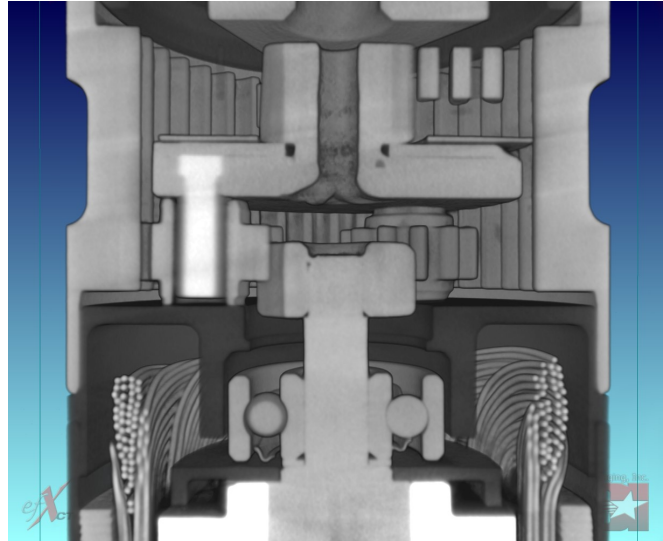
Side View of the First Planetary Gear Stage with the Motor Pinion at the Center. The Bearing is Displaced Downward in the Image
